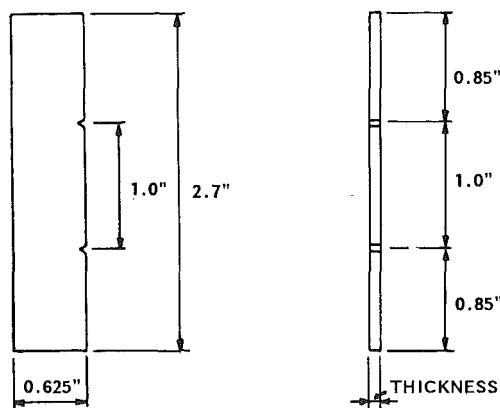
Nominal Dimensions of Compressive Coupons Used for 100XF, 50XF, and 35XF Sheet Steels
